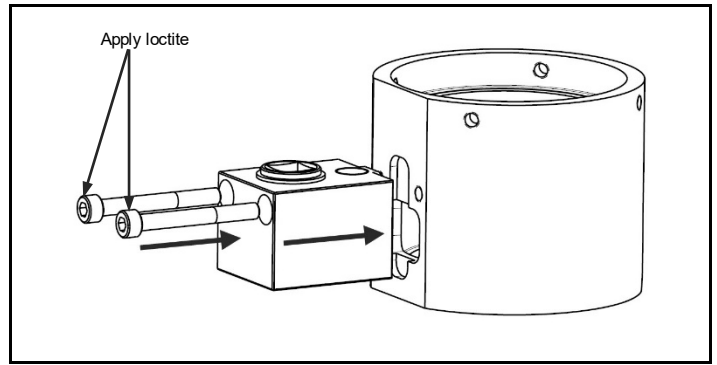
Apply loctite to cap screws, secure assembled gearbox to bridge
